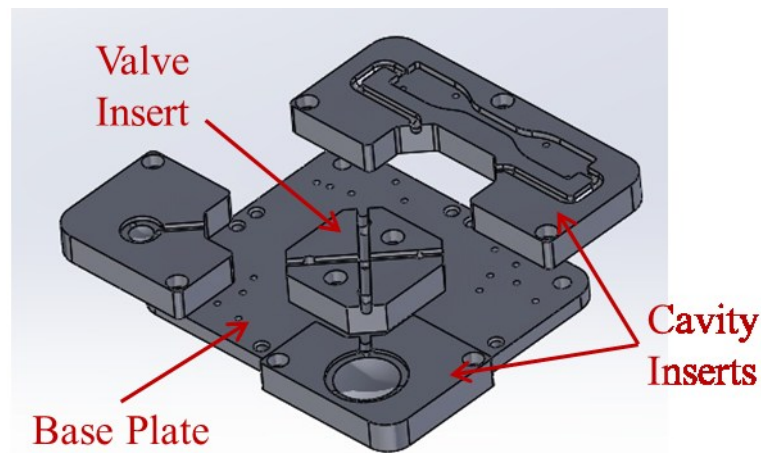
Modular Cavity Inserts Assembly – Exploded View
